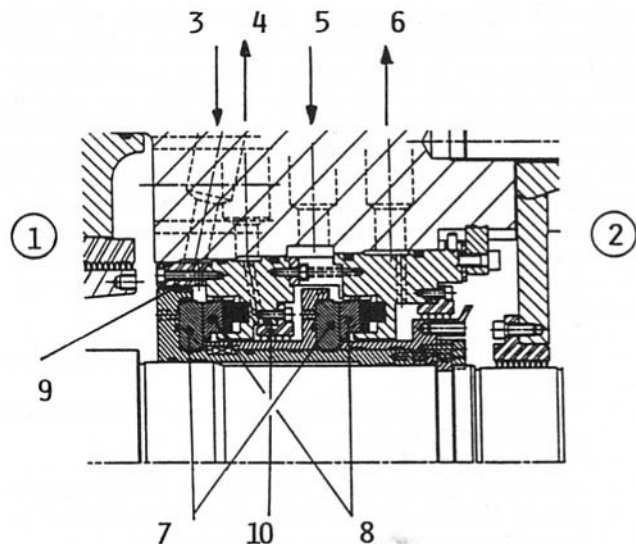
Initial dry gas seal arrangement: (1) compressor side; (2) bearing side; (3) internal buffer gas inlet; (4) to flare; (5) external buffer gas; (6) vent; (7) grooved rotating rings; (8) stationary mating rings; (9) internal labyrinth; (10) intermediate labyrinth
